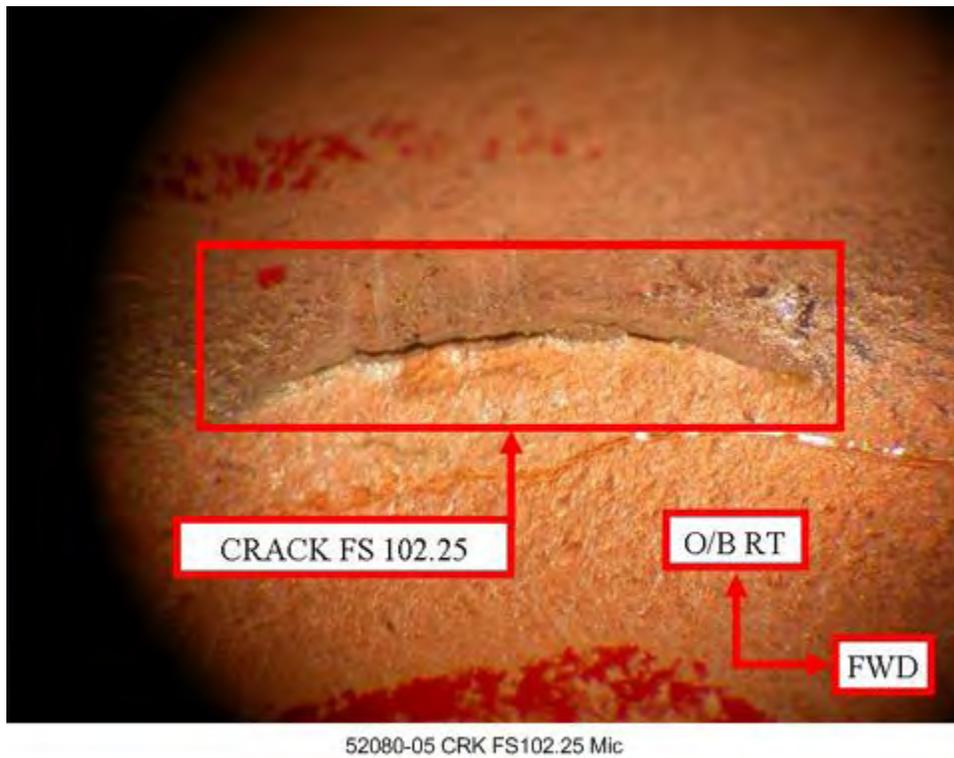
Microscopic View of the Crack on the Center Fuselage Right Stringer FS 102.25
